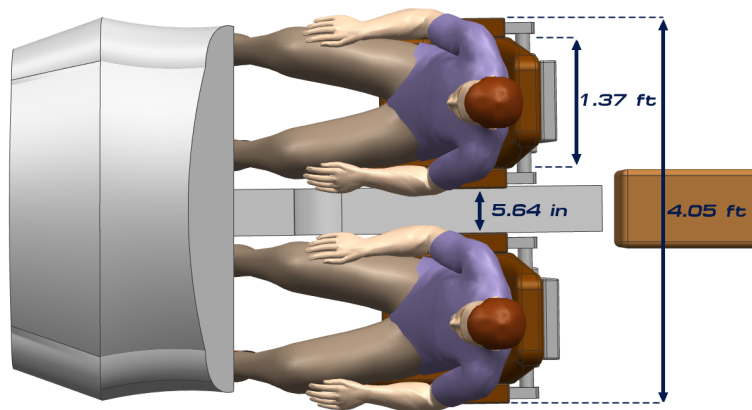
Top view of BROL-21. The BROL-42 shows similar measurements
